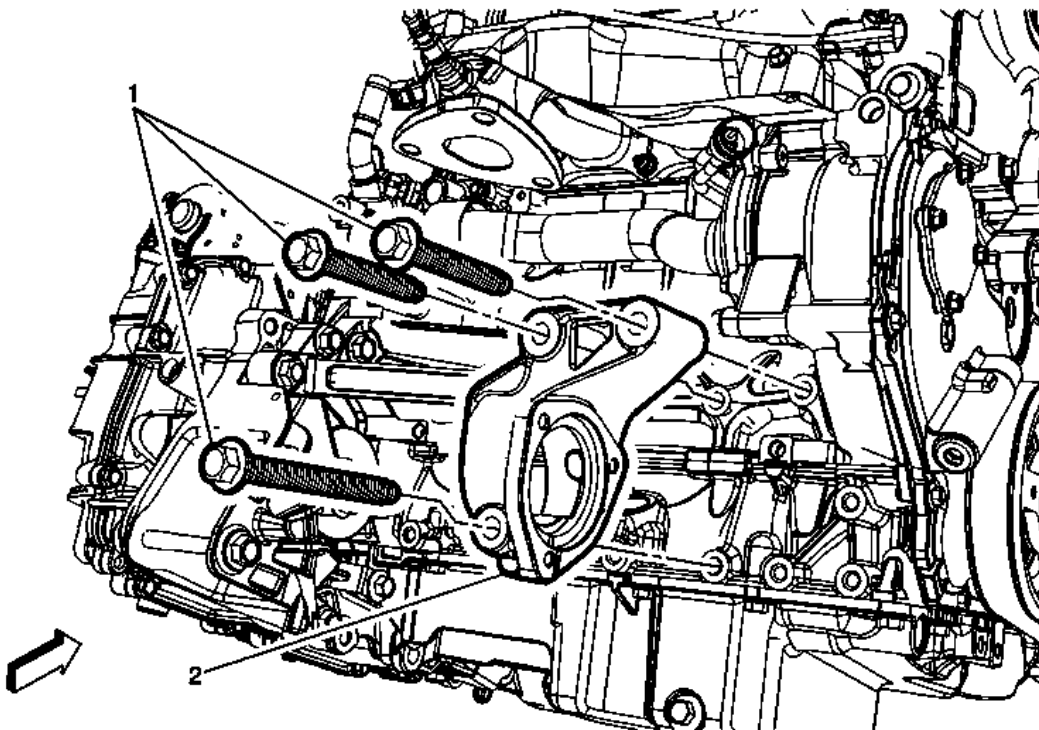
Front Wheel Drive Intermediate Shaft Bracket & Bolts
